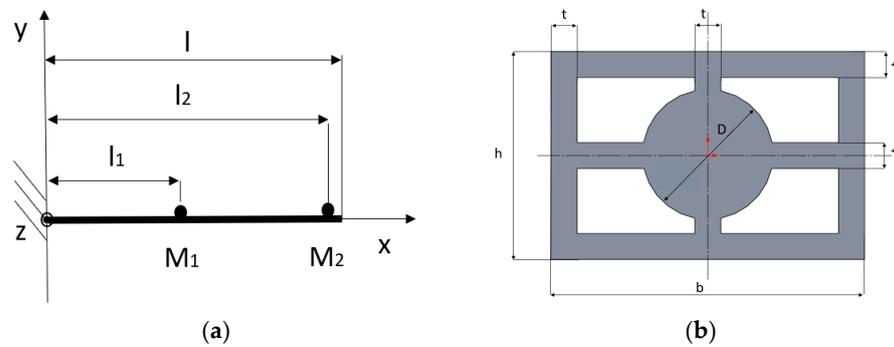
Cantilever beam: (a) System schematic representation; (b) Cross-section details.
